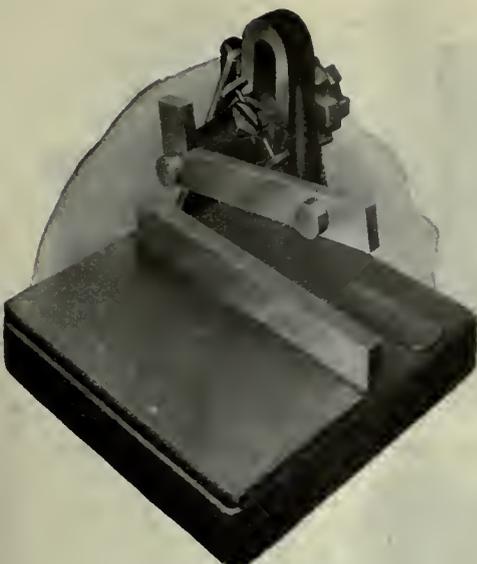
A SEPARATE VIEW OF THE SINE BAR FIXTURE.
